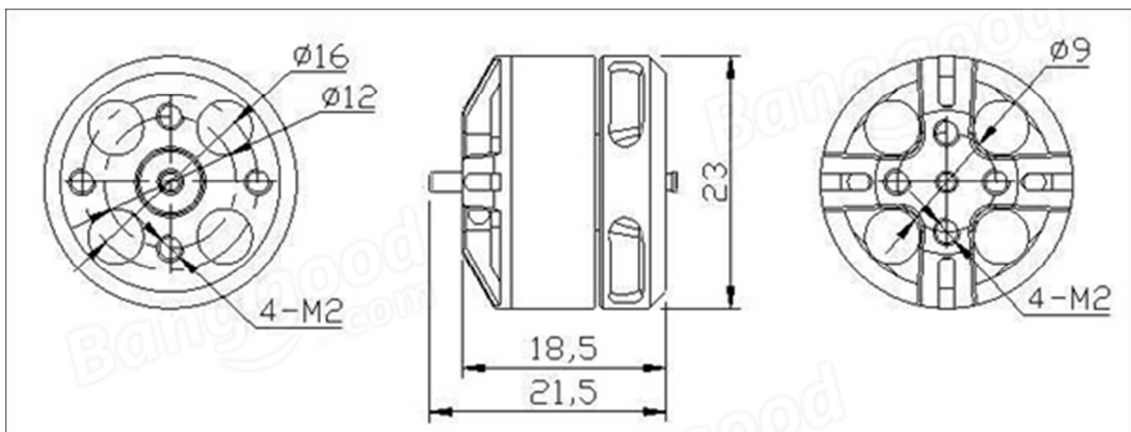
Brushless motor DYS BE1806-2300kv dimensions
